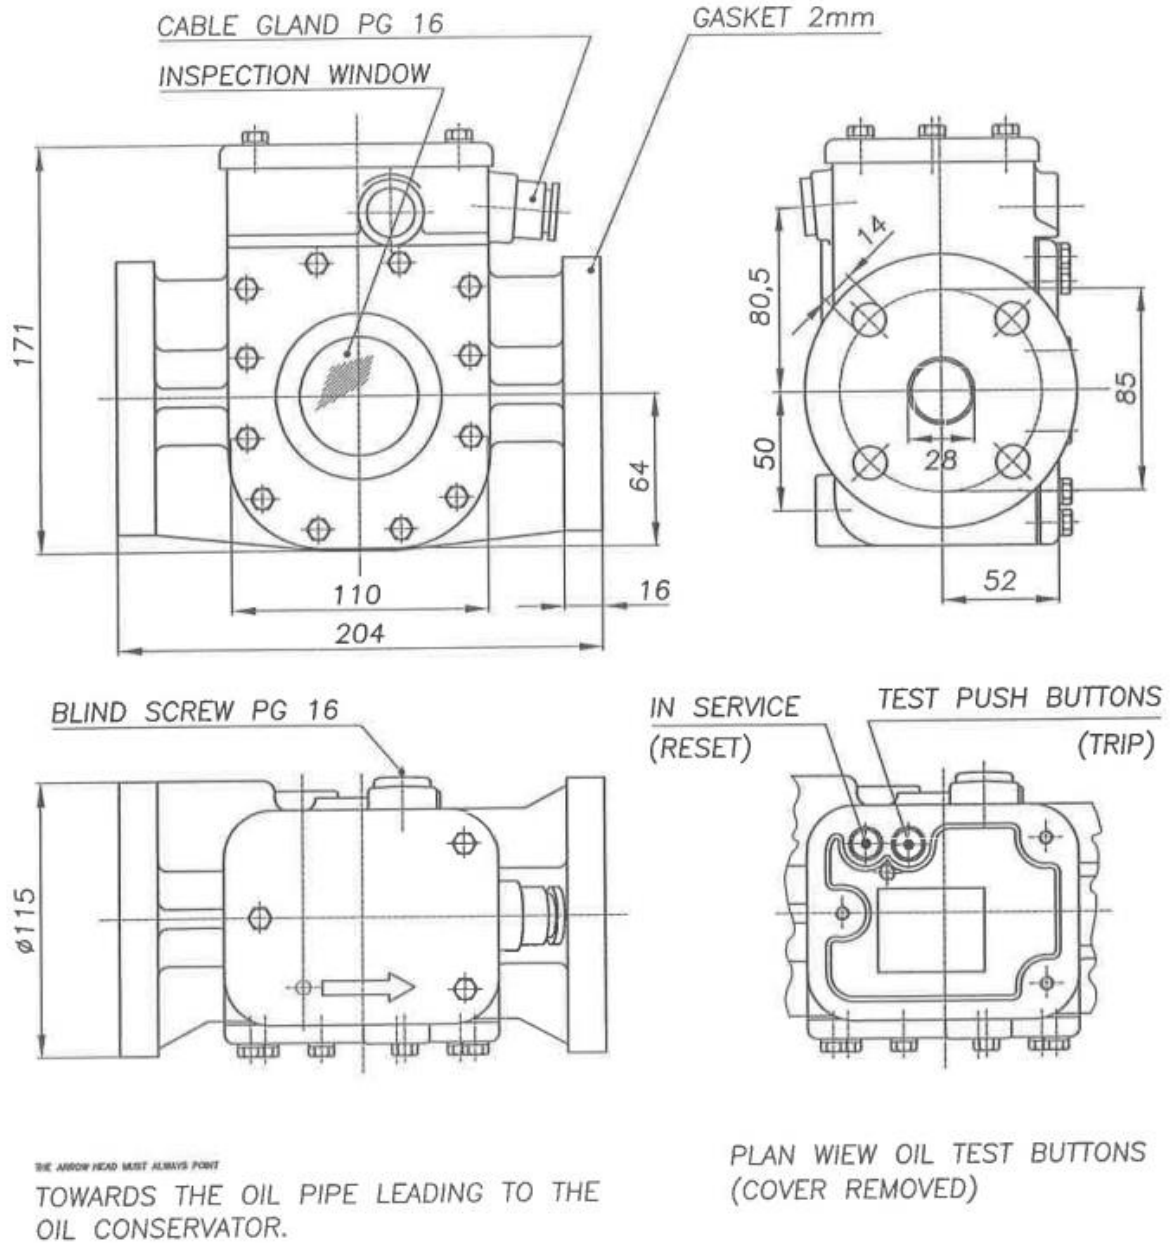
Dimensional drawing, type 05, 06, 07, 08, 09, 24
